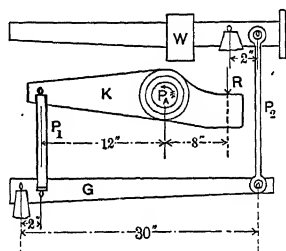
WEIGHING HEAD OF OLSEN TORSION-MACHINE.
